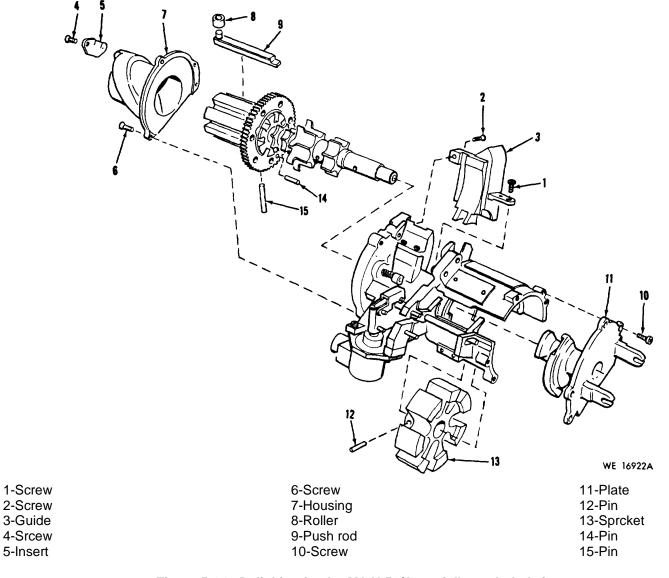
Delinking feeder MA U-56/A-partially exploded view.
